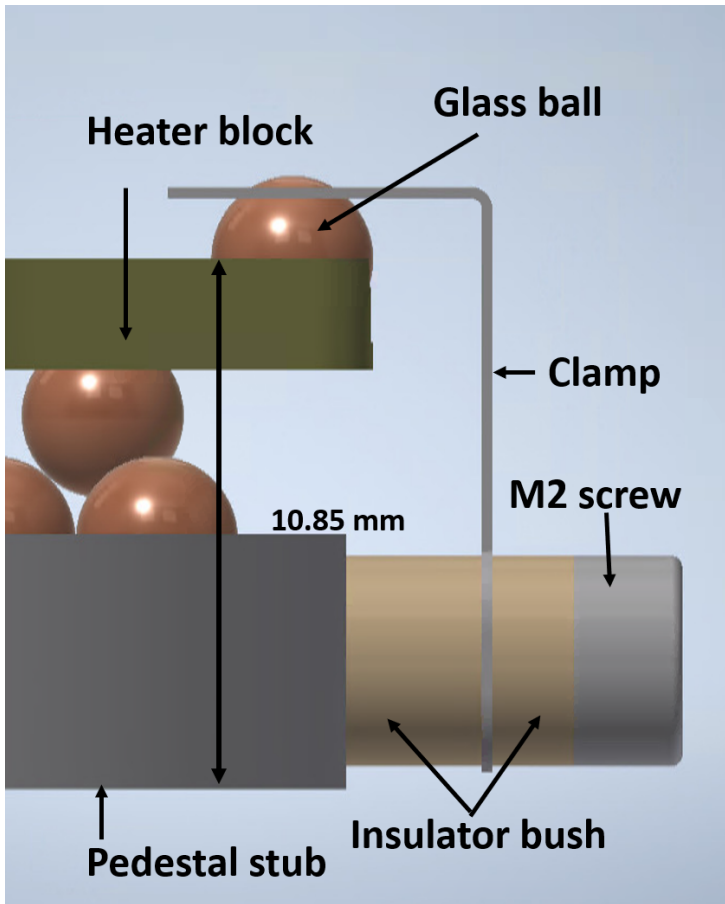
CAD drawing showing the side view of a clamp with the glass ball on top of the heater block and the insulator bushes to thermally isolate the clamp
